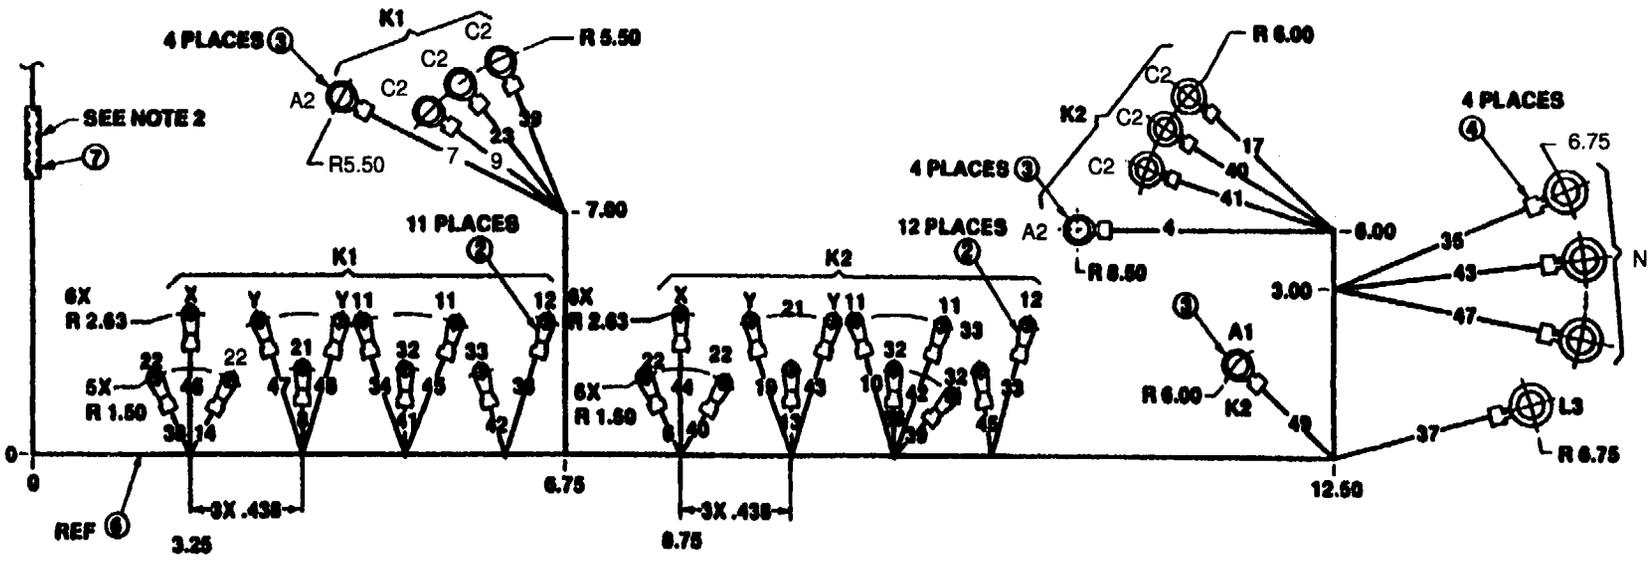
Switch Box Harness Assembly W9 (Sheet 2 of 4).
